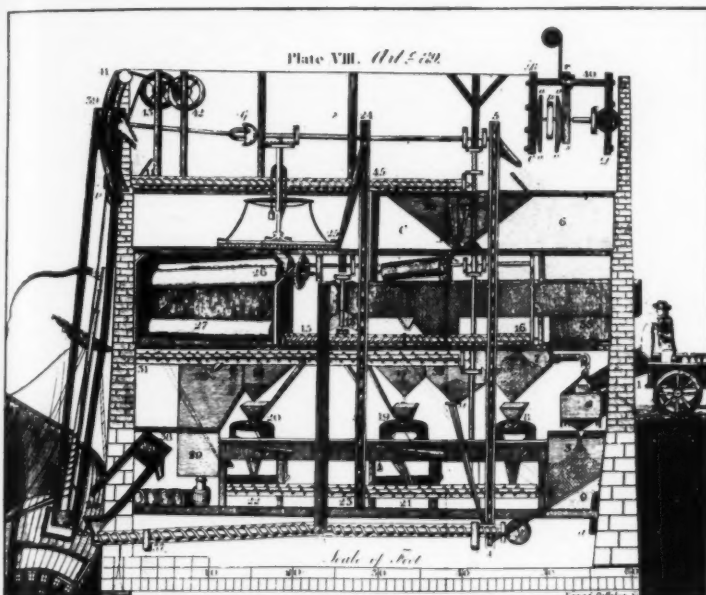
This illustration, taken from Oliver Evans' book published in 1790, shows that even then, engineers were trying to sell industry better handling methods. (Courtesy Young Millwright & Millers' Guide.)
